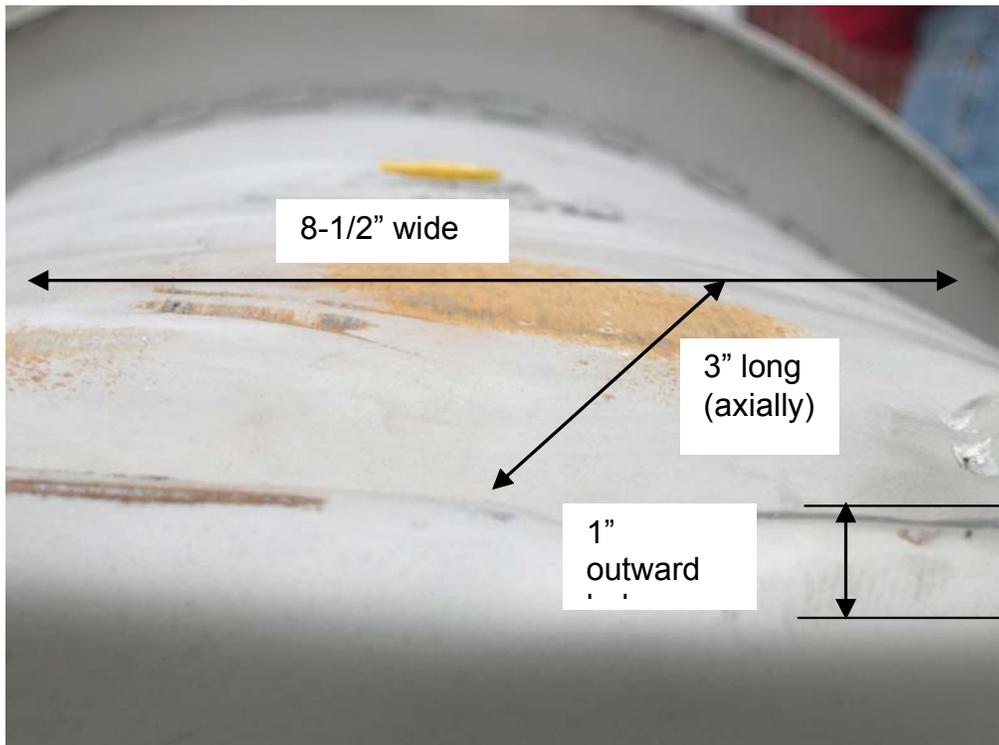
Top Nozzle End Outerpack Impact Damage
